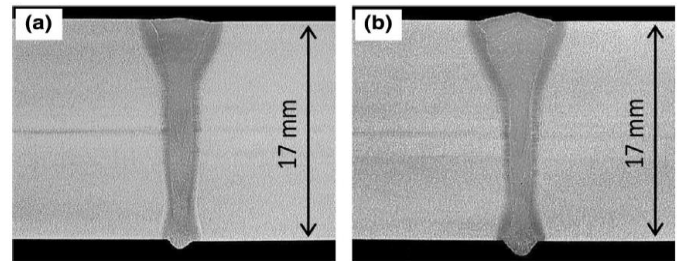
Cross-sectional macrostructure of weld fusion zones of 17 mm thick butt joint welded with wire (a) 1.2 mm diameter (b) 1.6 mm diameter [11]
